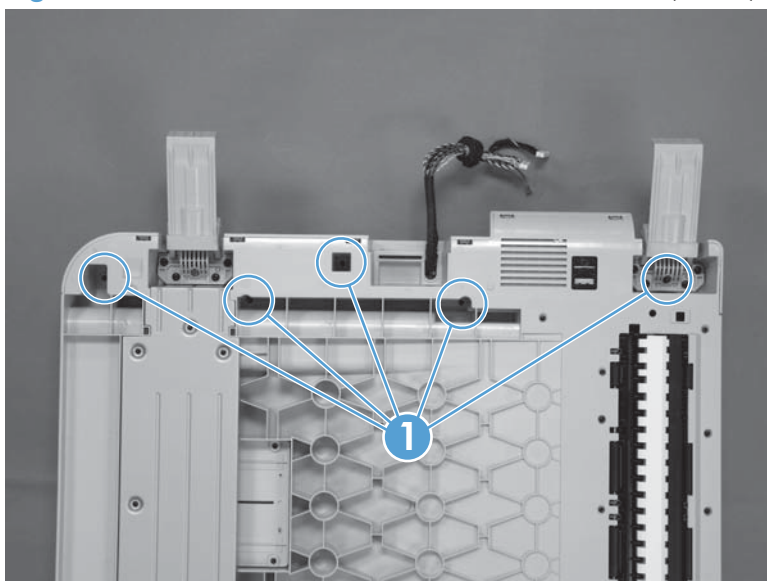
Remove the document feeder roller cover (4 of 4)
